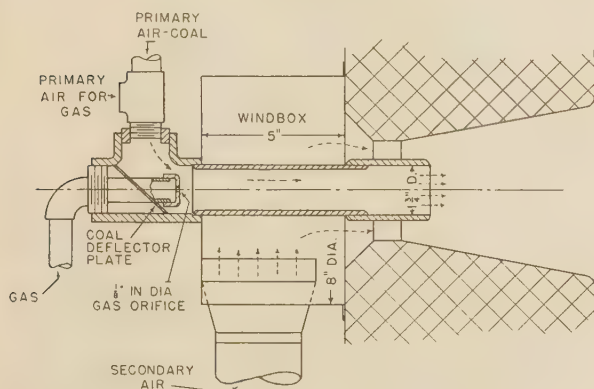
EXPERIMENTAL PULVERIZED-COAL BURNER USED ON LABORATORY FORGE FURNACE
